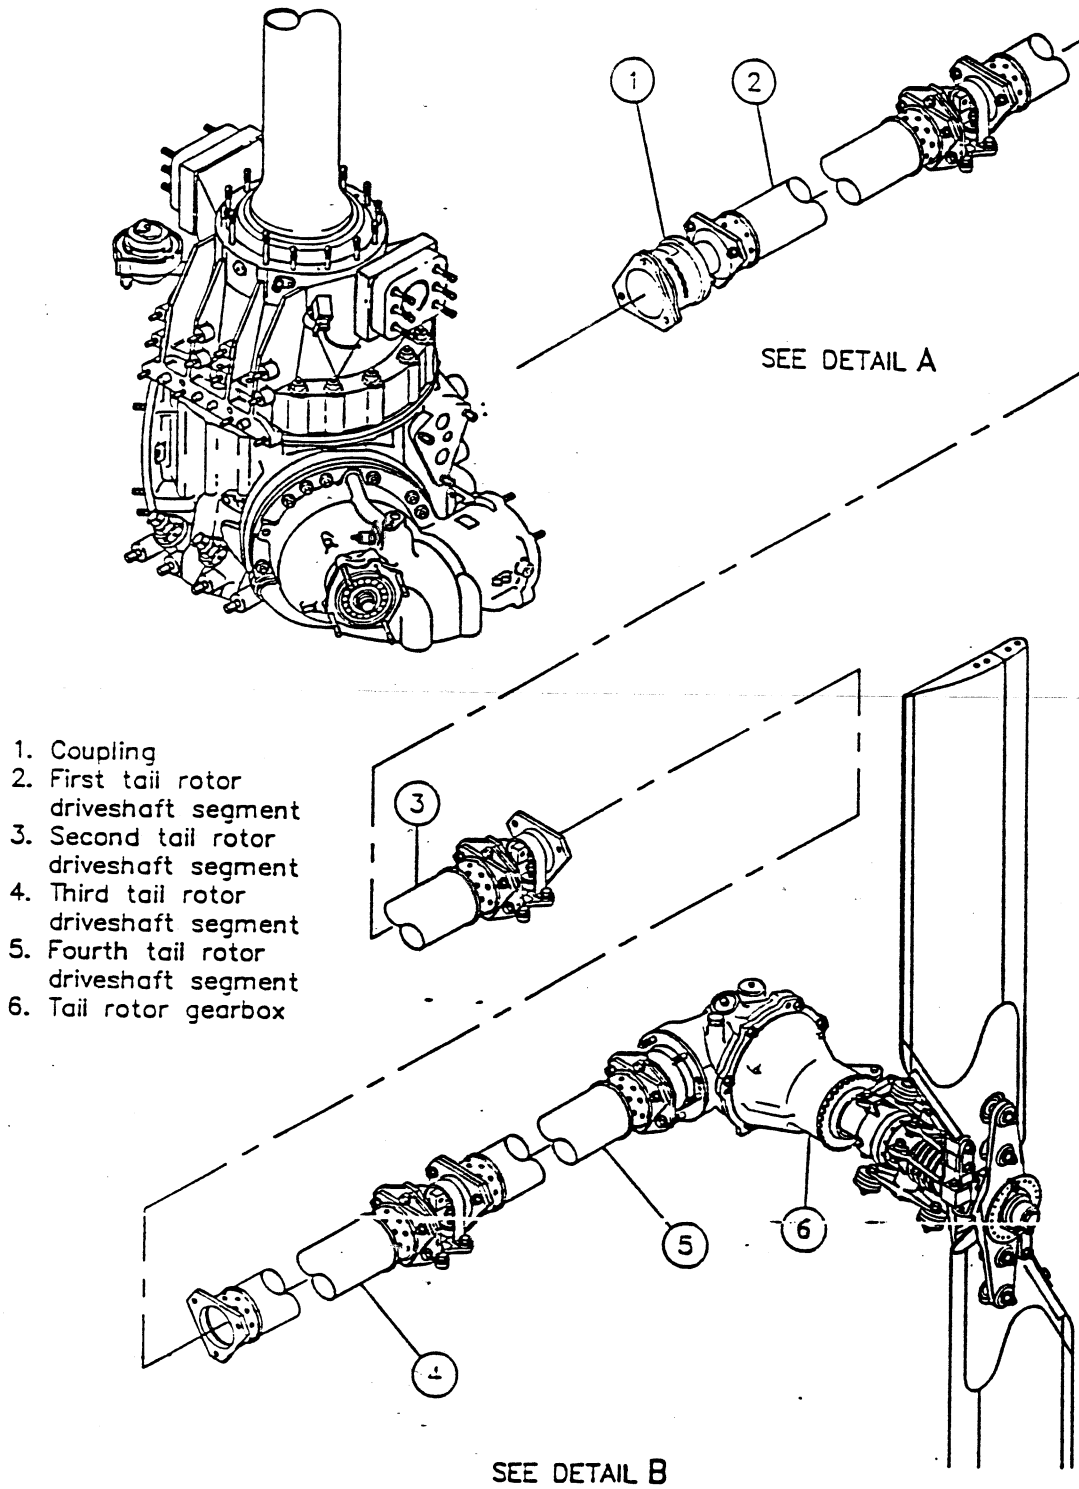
, Tail Rotor Driveshaft and Coupling Installation (1 of 3)
